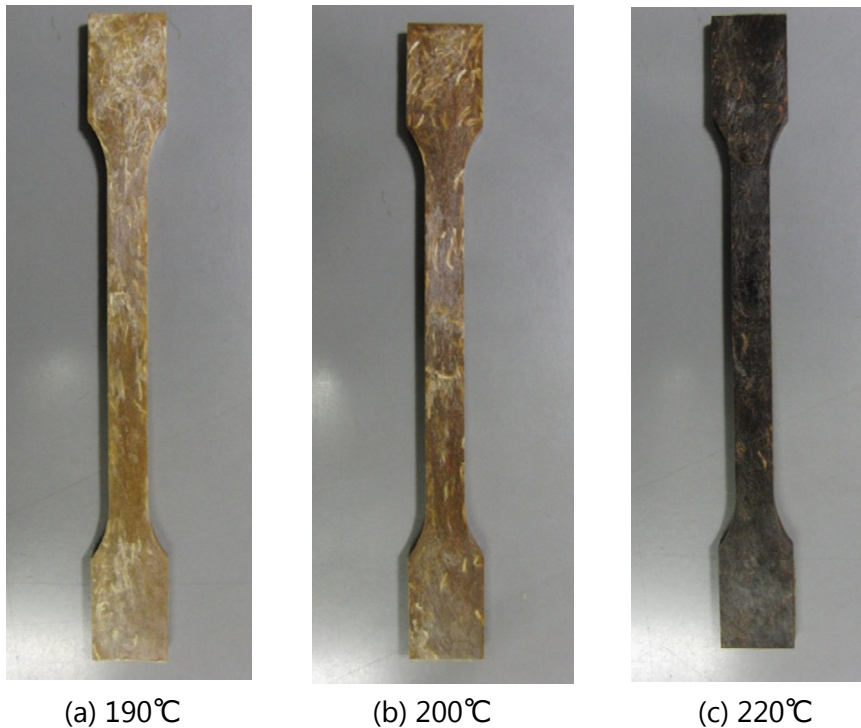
The appearance of injection-molded Jute/PA11 specimen at various molding temperature.
